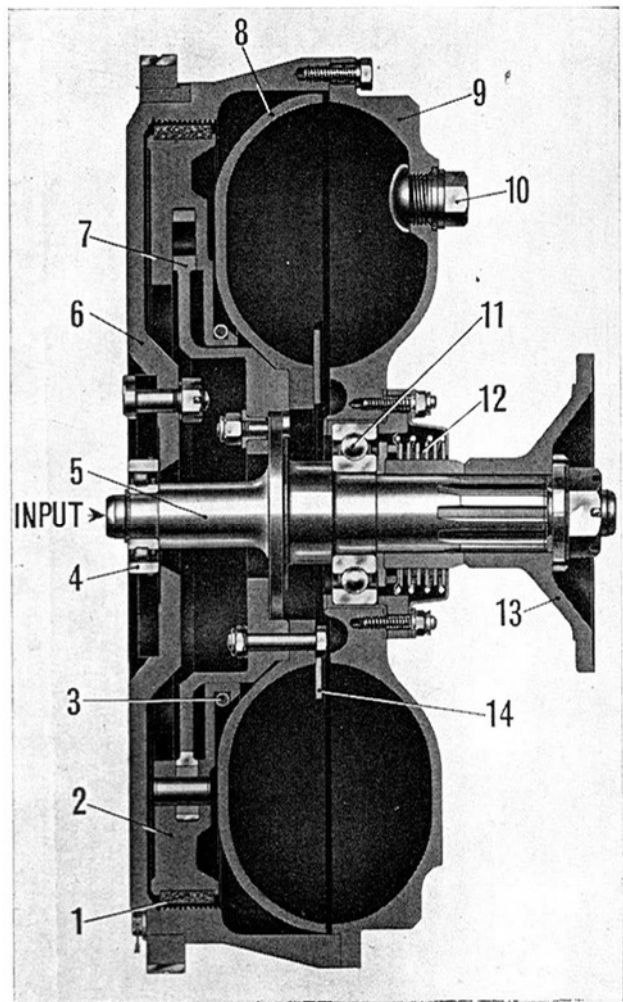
SECTION THROUGH THE 18" FLUID CLUTCH
